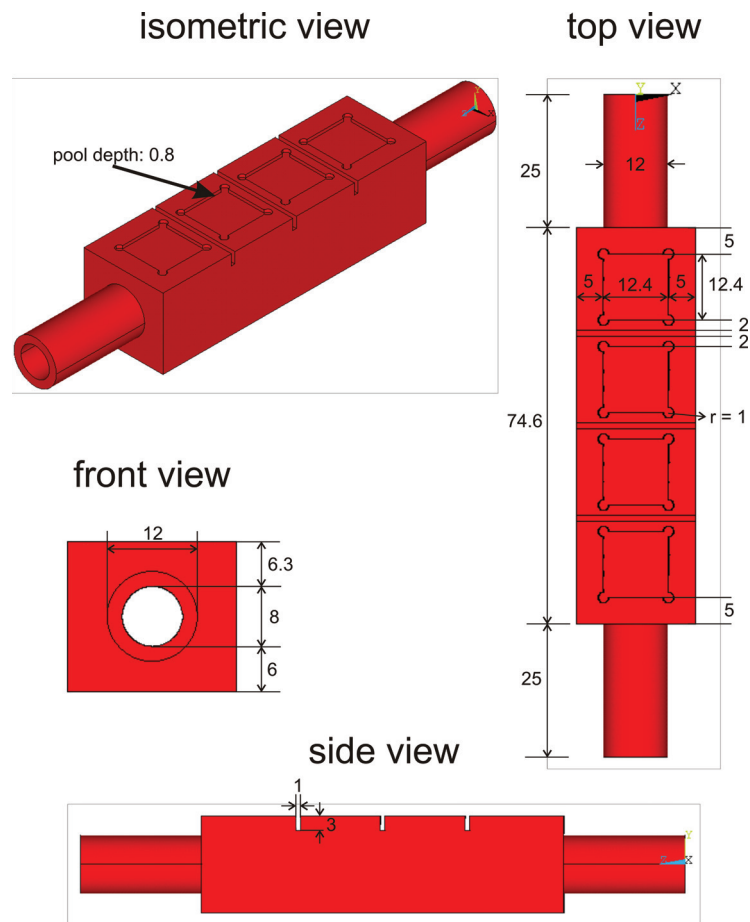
Schematic drawing of the final mock up geometry. All dimensions are given in millimetres.
